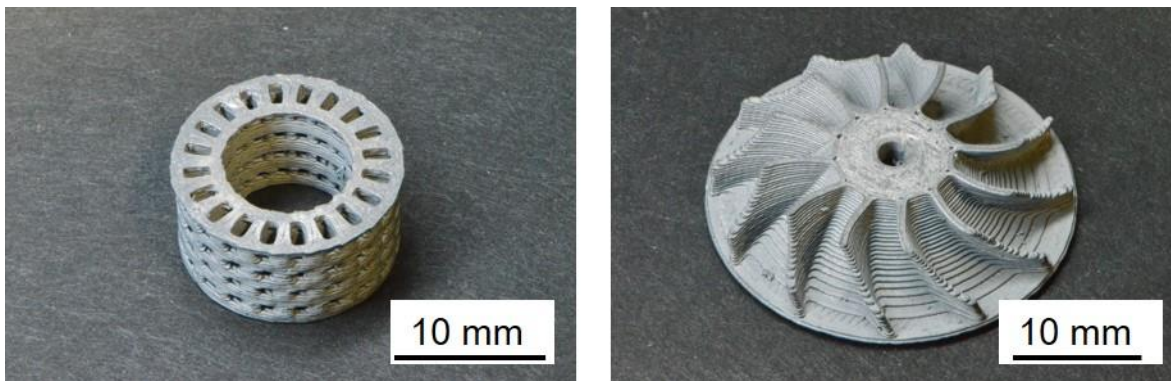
Sintered hardmetal parts, left: catalyst body, right: turbocharger impeller.
